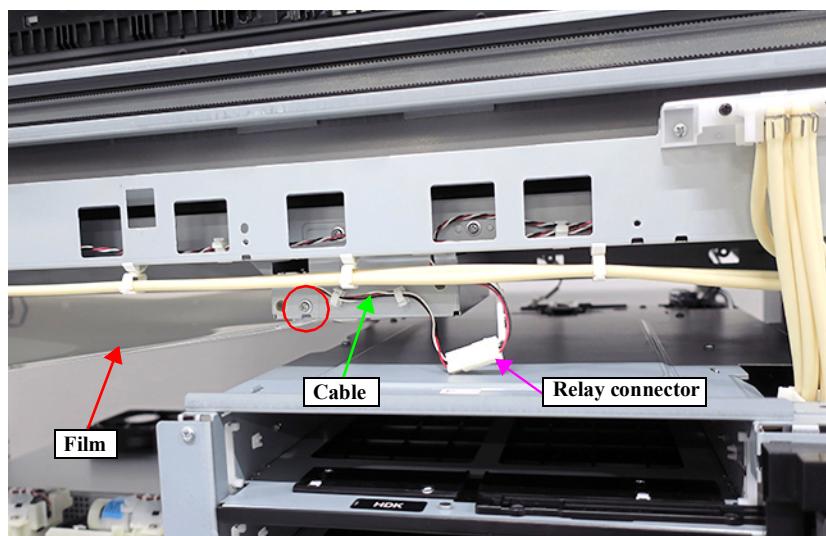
Removing the SUCTION FAN RIGHT (1)
